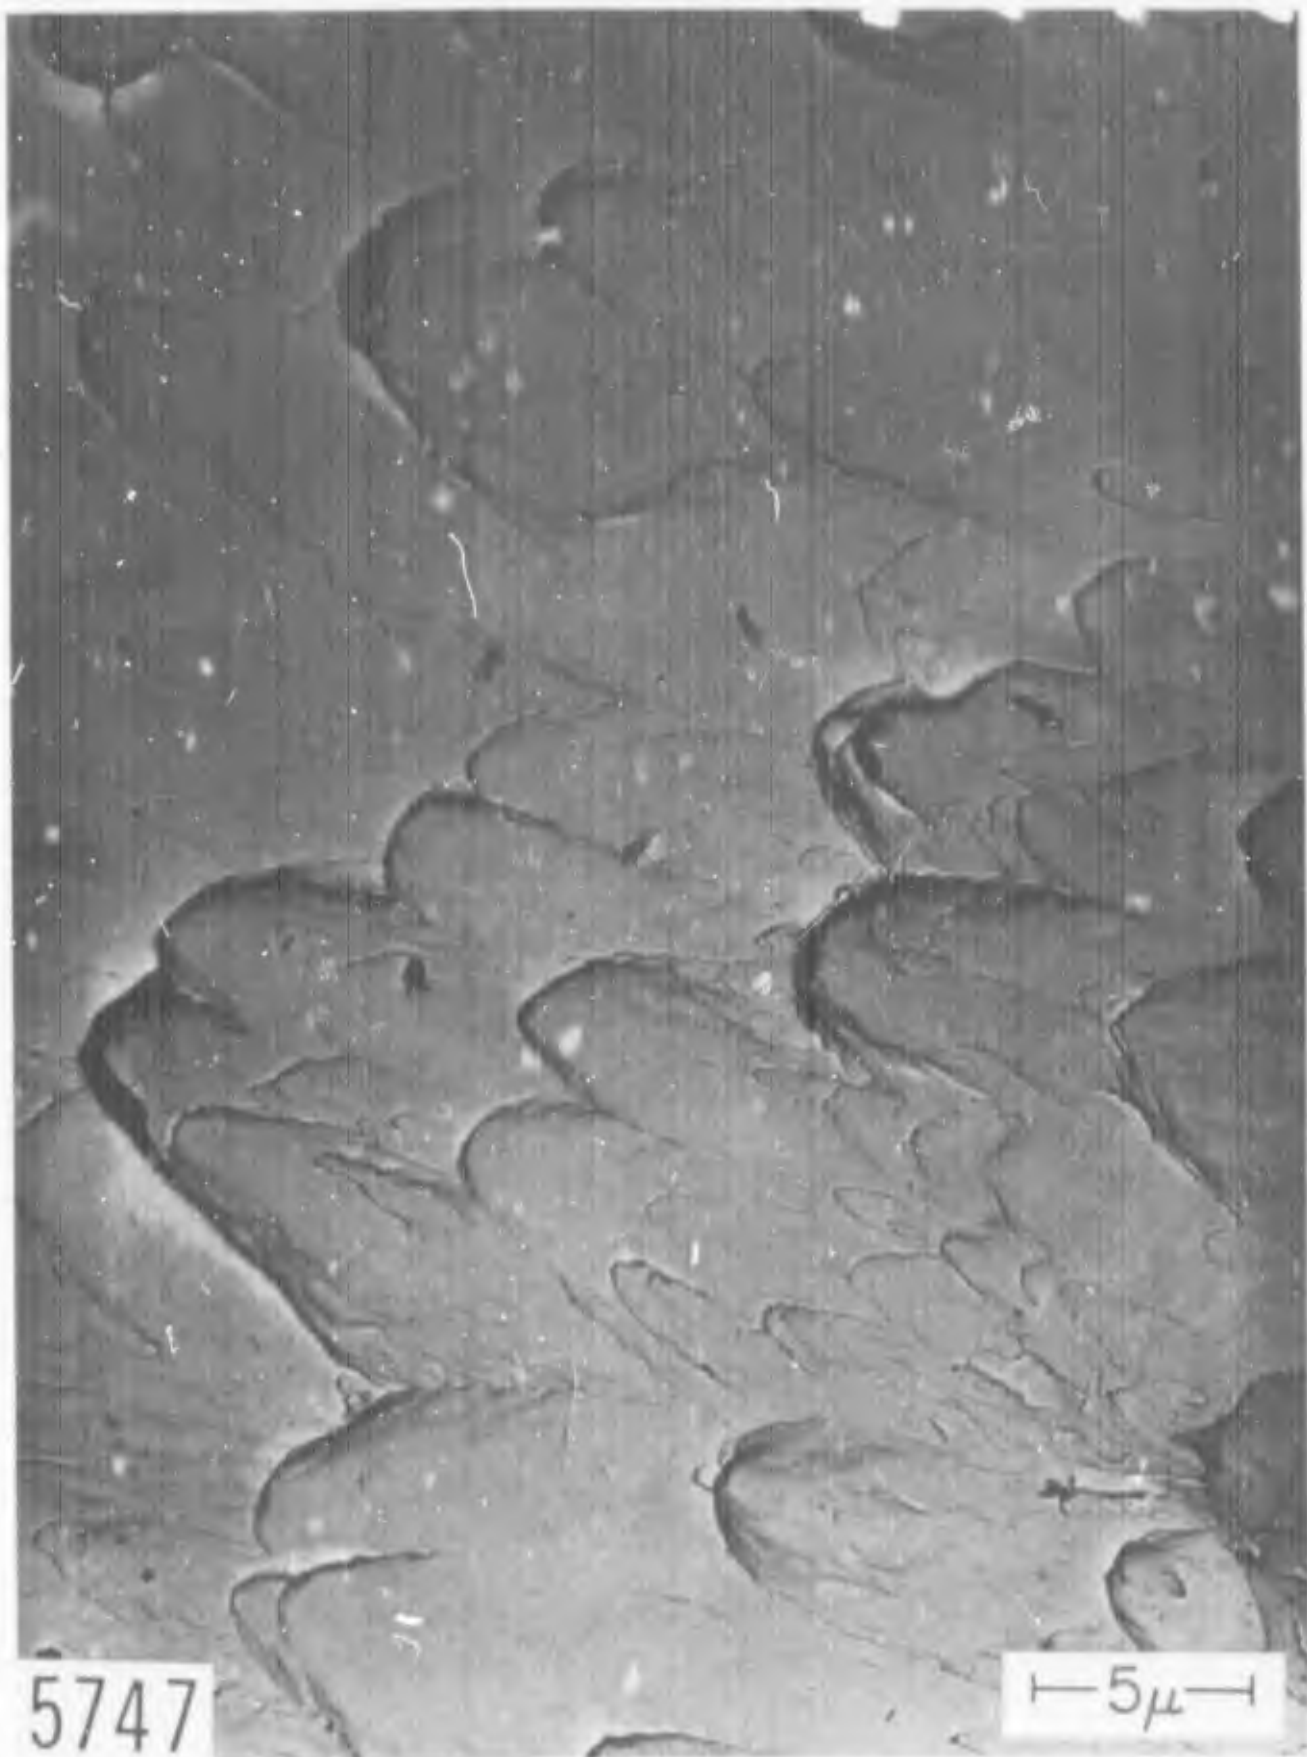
Shear rupture dimples in 99.999% Cu. These dimples were formed by lightly rubbing two mechanically polished surfaces together, causing friction welding and subsequent rupture. Two-stage palladium-shadowed carbon replica. 6000X.
